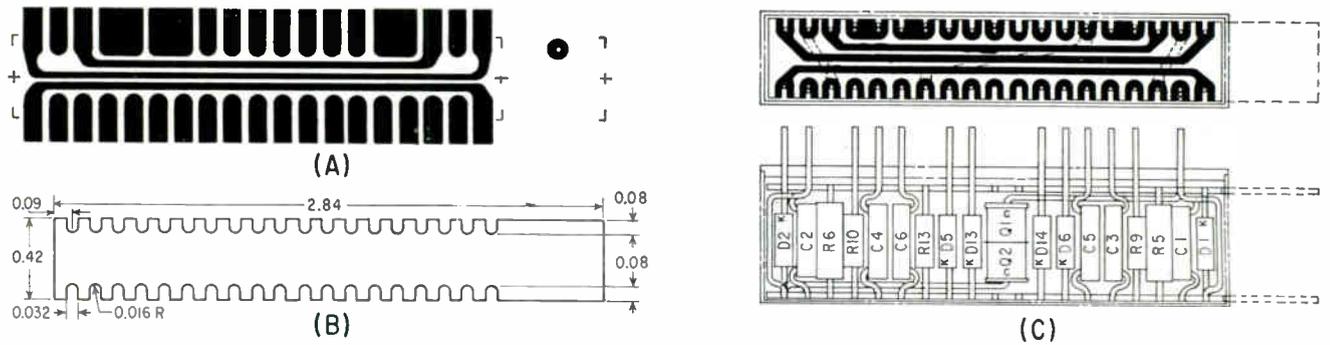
Artwork for a single board side (A), board blank dimensions (B) and a portion of an assembly layout (C)
